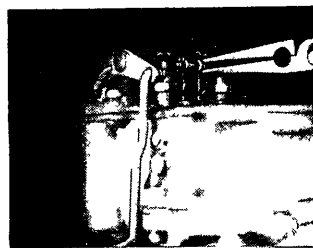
Install metering rod disc, retainer and screw, and metering rods, spring and pin. Metering rod discs must be under retainers
